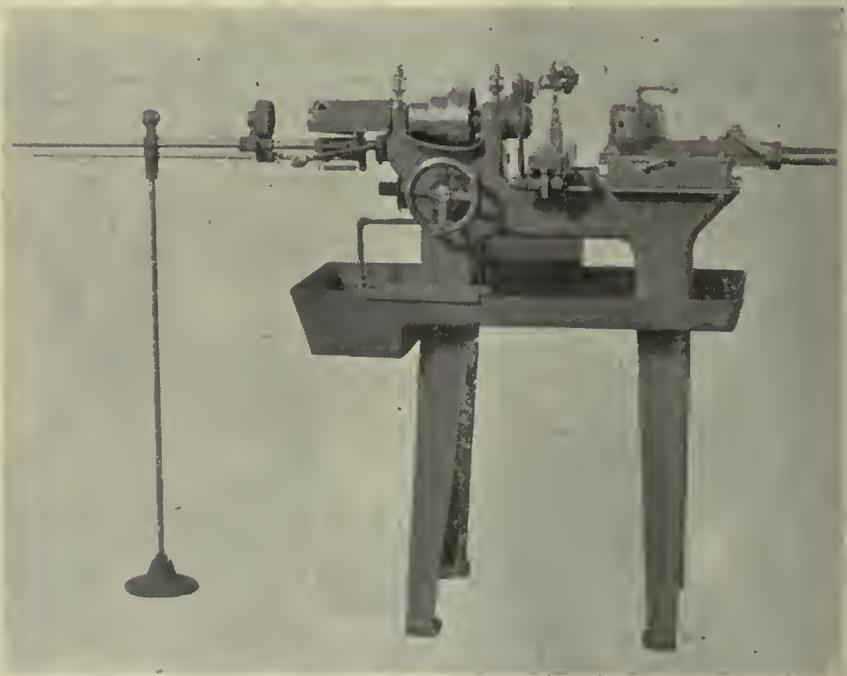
NO. 0 SCREW MACHINE—FRONT VIEW.
